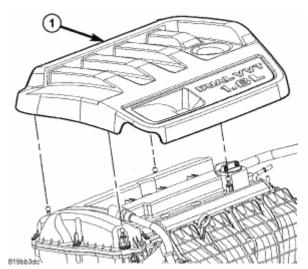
ENGINE COVER Courtesy of CHRYSLER LLC
